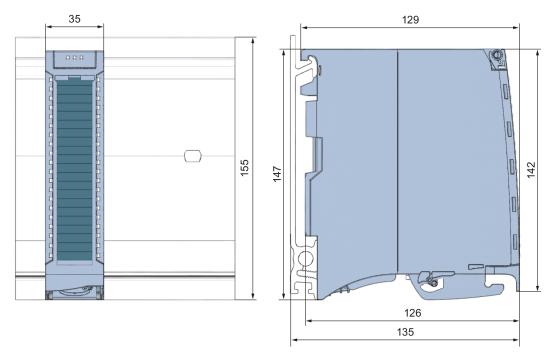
Dimensional drawing of the DQ 16x24VDC/0.5A ST module
